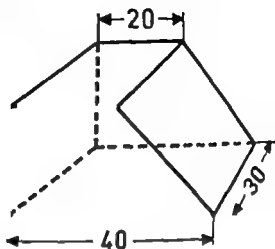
The dimensions (in mm) of the shielding filter used in the investigation
